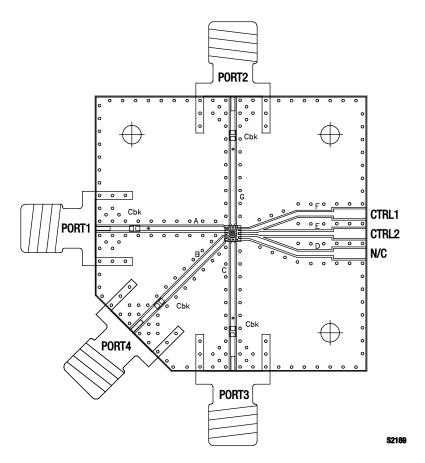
SKY13395-397LF Evaluation Board Assembly Diagram
